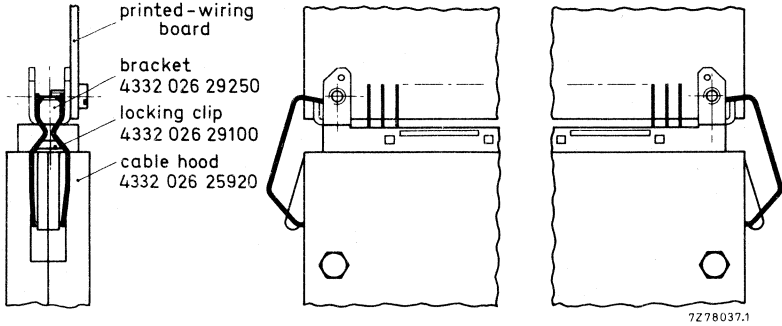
Mounting of a female part to a board with bracket having locking facility.
